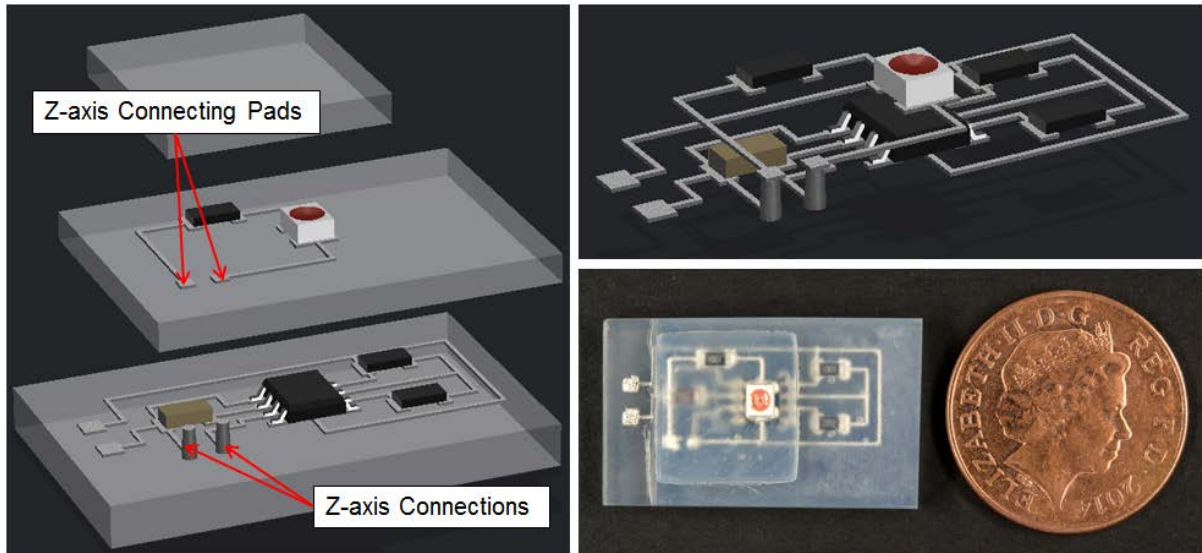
Exploded design, circuit layout and photograph of the 2 layer demonstrator
